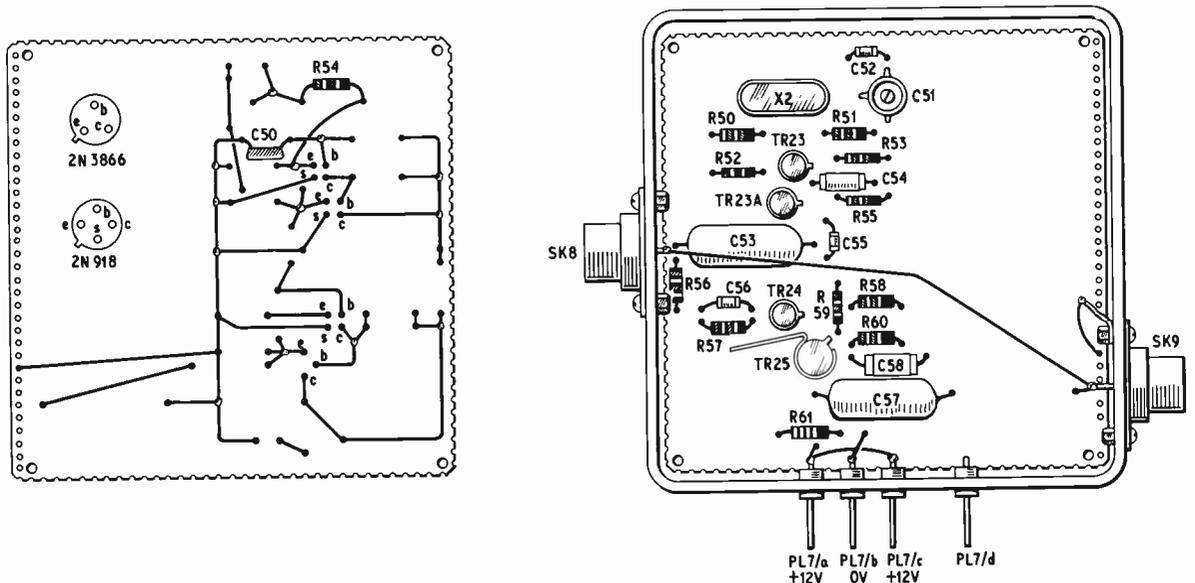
Component layout and wiring of the Third Oscillator module
